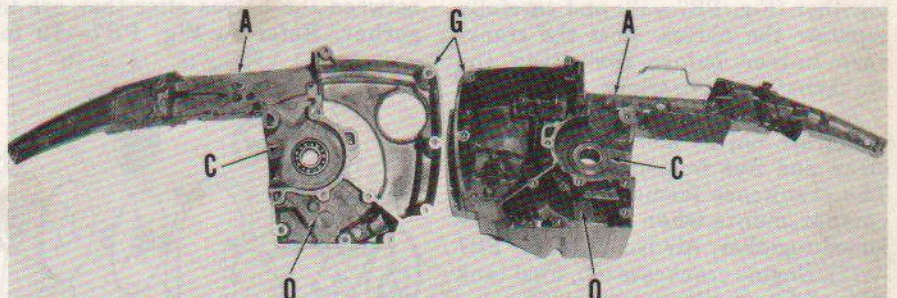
The right side of crankcase should be assembled as shown before positioning the left half on top.
